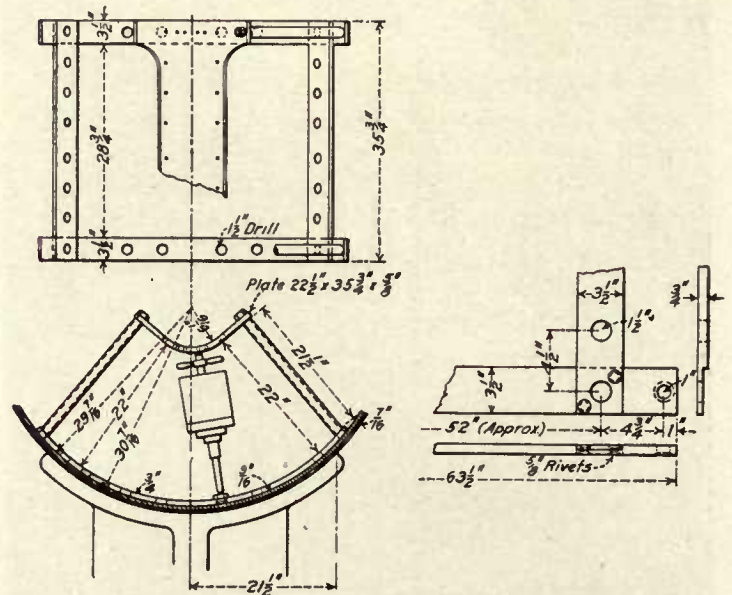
Jig for Boring Cylinder Saddle Bolt Holes.
